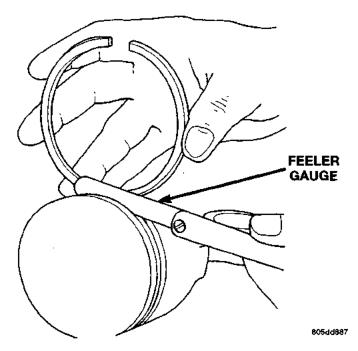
Ring Side Clearance Measurement Ring Gap Measurement
